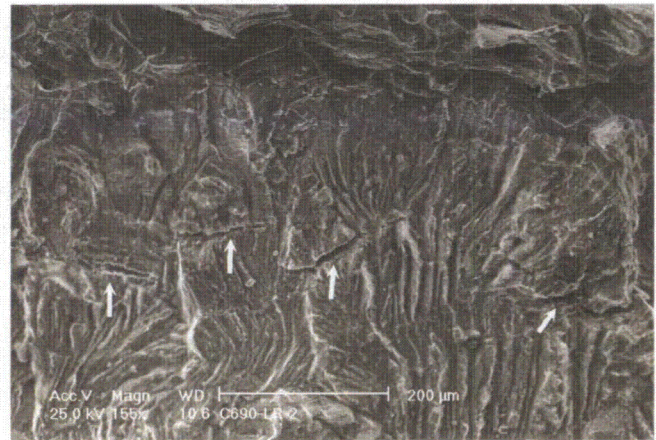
Fracture surface of specimen C690-LR-2. Crack advance is from bottom to top.
